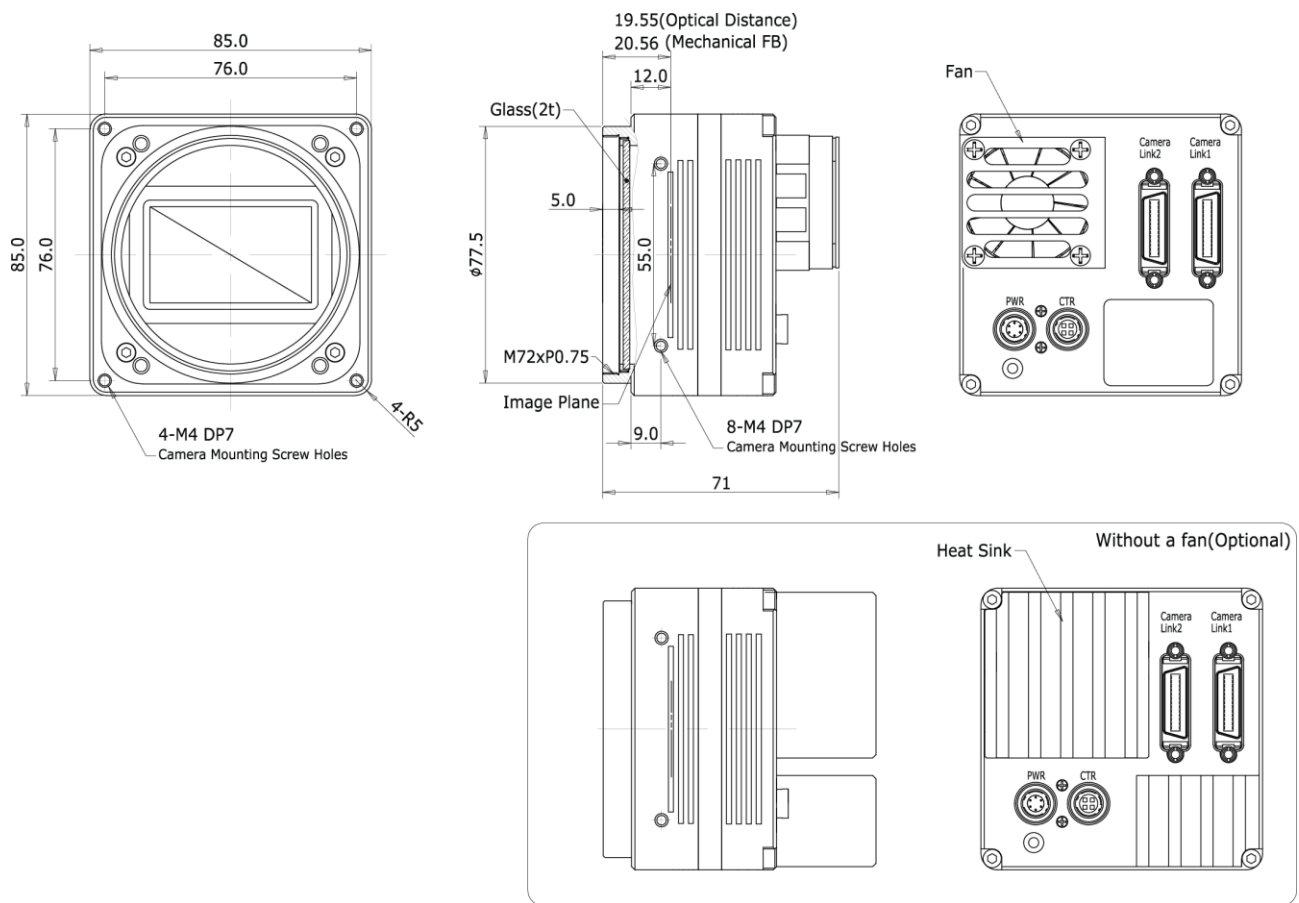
VA-47MC M72-mount Mechanical Dimension
